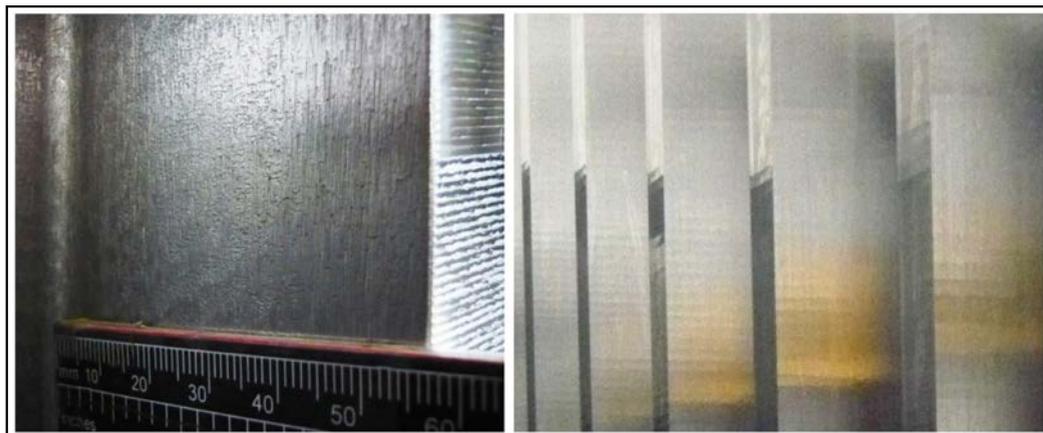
(Left) Surface “scraping” on a tooth flank due to HSS tool wear on a 300 HBW gear: Ra 5 µm; (right) 320 HBW gear cut with carbide tools: Ra 0.6 µm.
